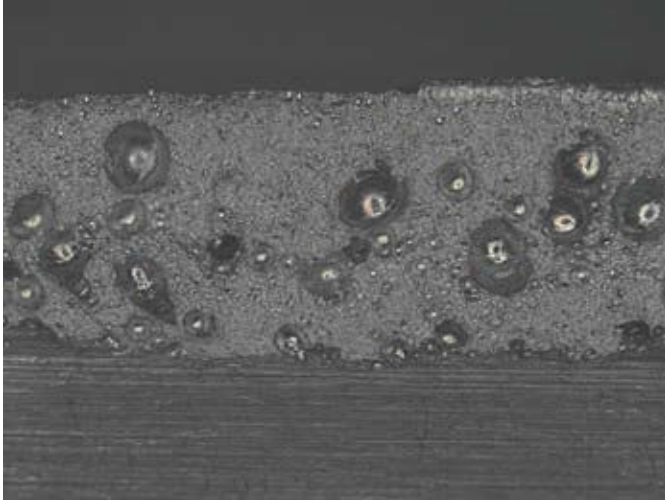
Scattered Porosity Found In The Internal Structure Of An Aluminum Weld After Nick-Break Testing.
